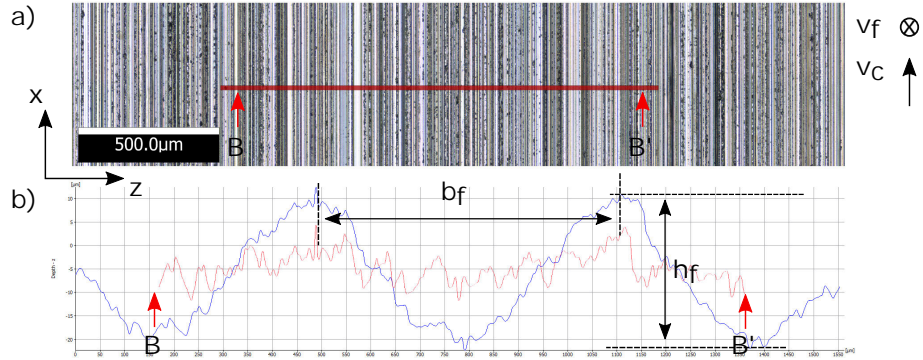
(a) Top view of the workpiece surface. (b) Cross-section of line  $B - B'$  with primary and waviness removed surface profiles.
